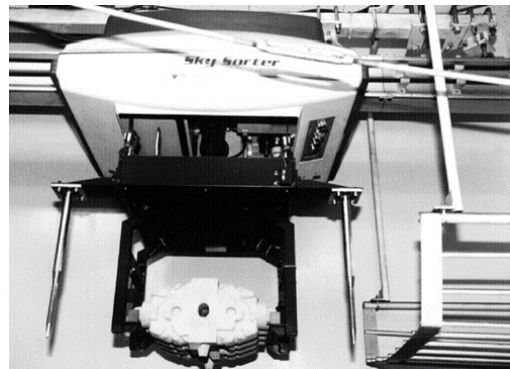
The electric-powered crane for moving the crankcase subassembly from the crankcase subassembly room to the CMPAA.
